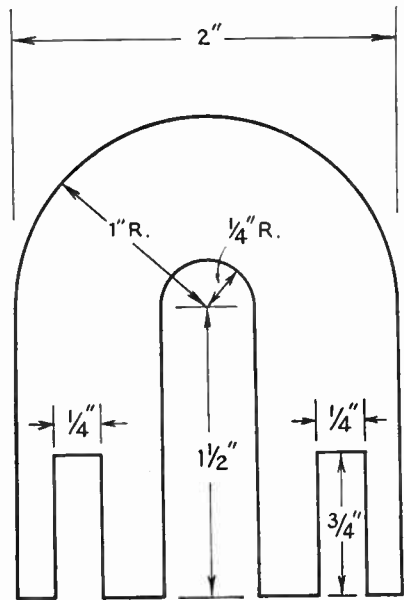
Tank inductance construction. This layout drawing is full-size and may be used as a template.
